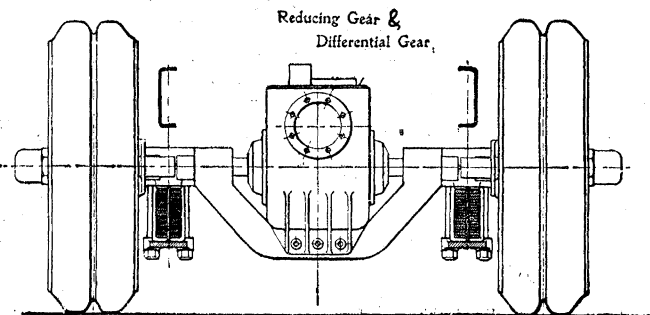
The Back Axle of the Leyland Six-ton Petrol Wagon.
